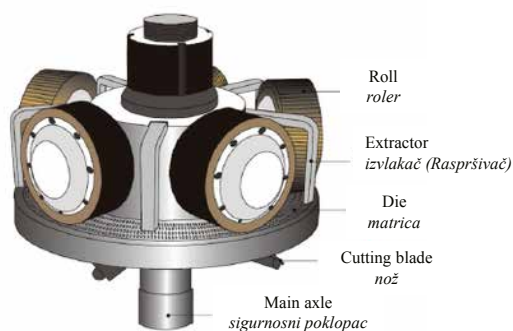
Pellet mill with flat die (source: ww.smallpelletmills.net)
